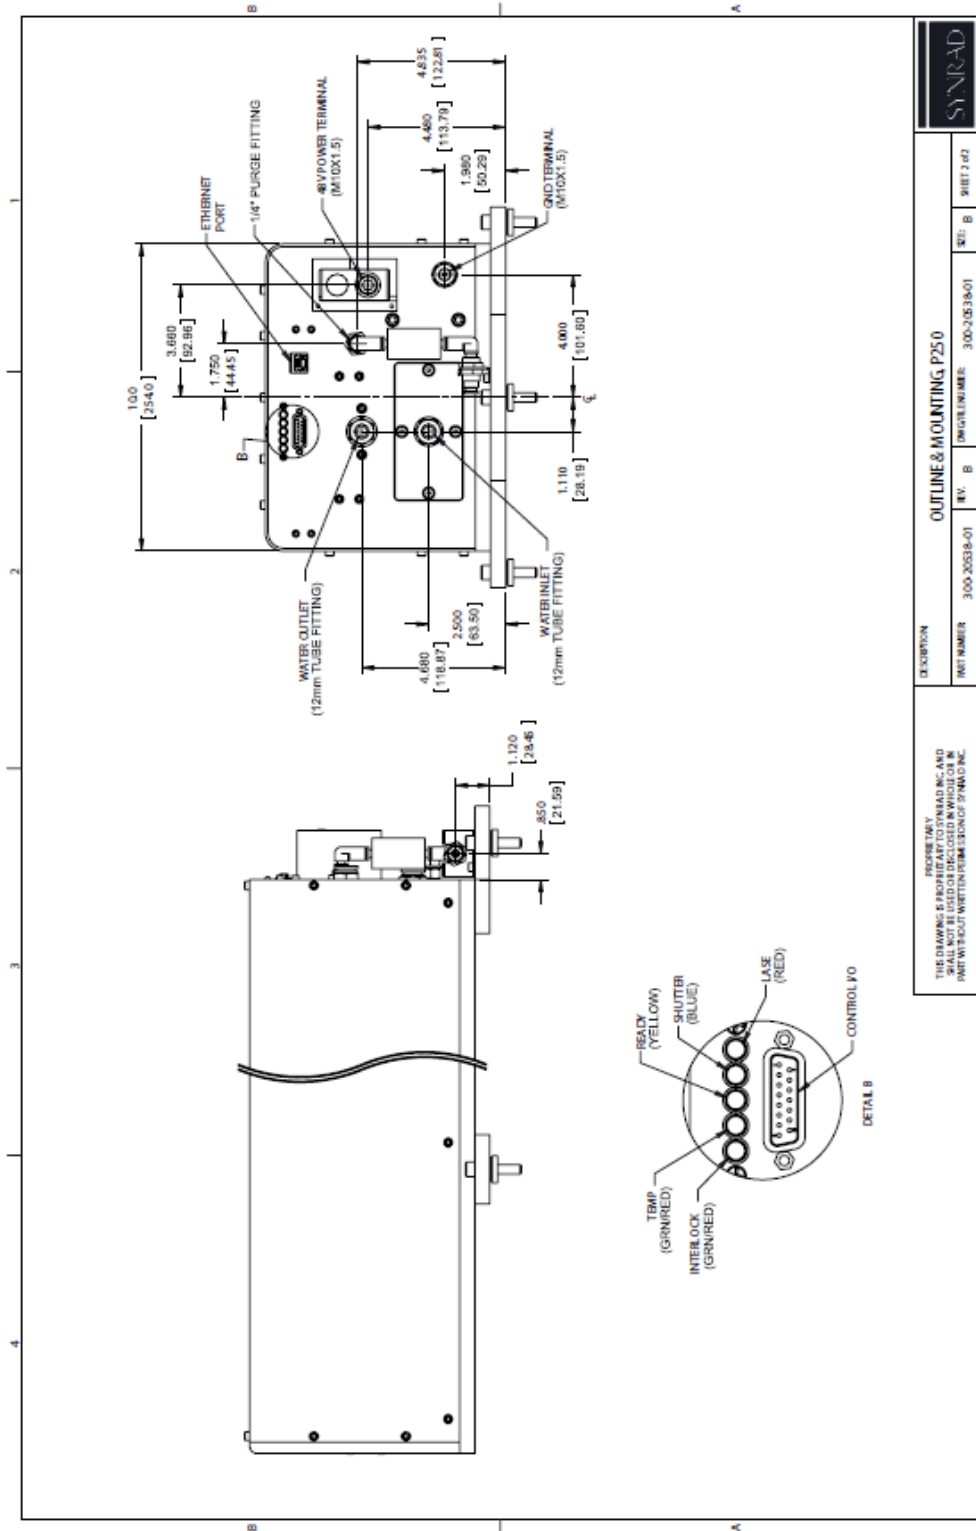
p250 outline & mounting dimensions (mounting feet removed).
